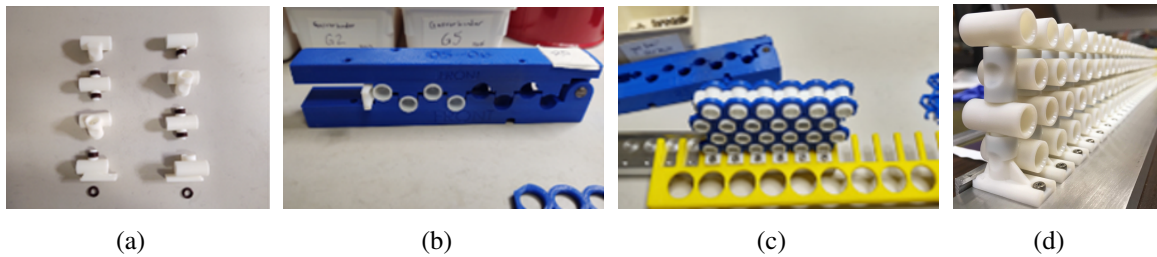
Gas-bar components and assembly: (a) Molded plastic gas fittings with o-rings form stacks of 4 (two different kinds); (b) blue 3-D printed jigging pre-aligns the 4 pieces of a stack; (c) stacks being mounted on a gas-bar manifold using more 3-D printed jigging parts to aid in alignment; (d) a gas-bar manifold with installed stacks, ready to be mounted on a chamber.
